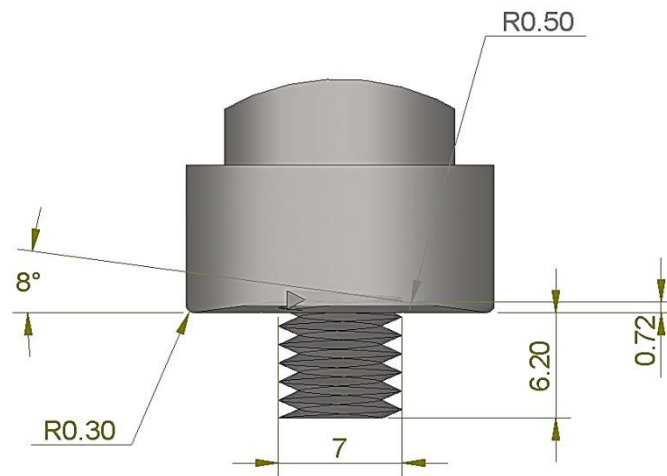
Geometry of tool pin used to weld the additional plates to A356 plate
